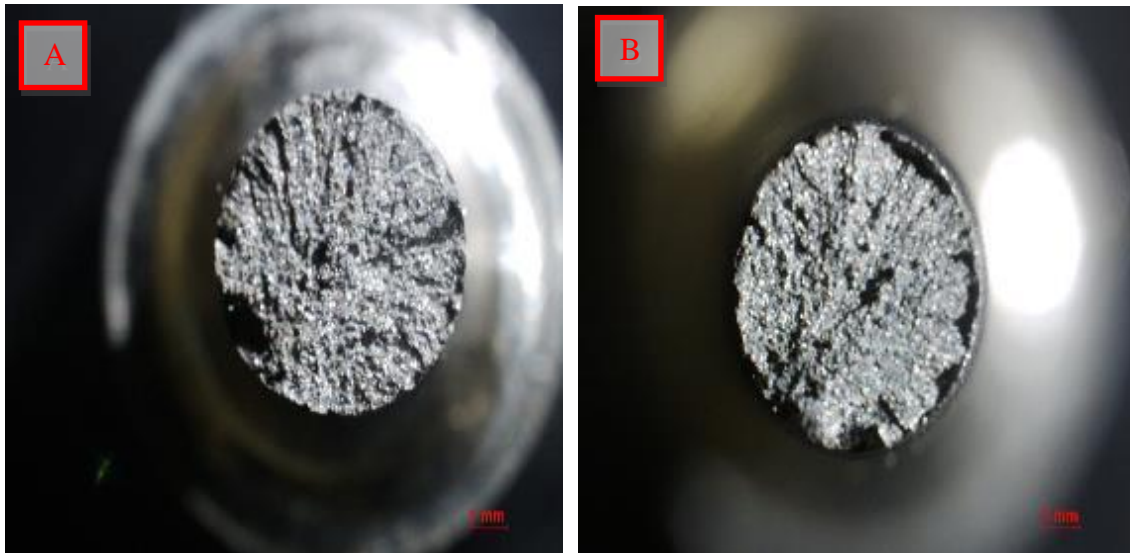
Fracture surface stereo image of the sample that was tensile tested on the HAZ of the web region. The fracture surface showed partial brittle with a flat appearance. Similar images were observed on the other samples.
